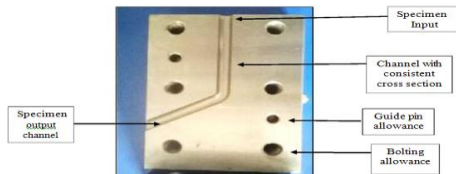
Illustration of the ECAP die with 120° channel angle
